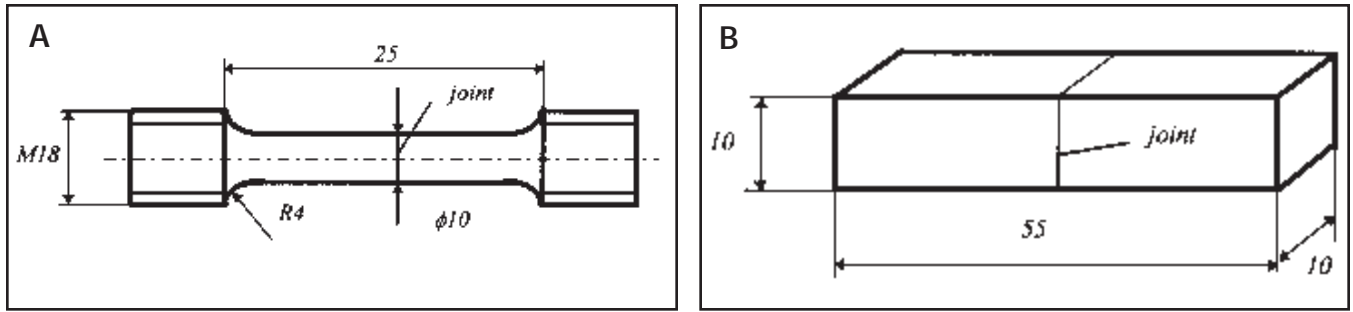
Shape and size (in mm) of test specimens. A — For tensile test; B — for toughness test.
